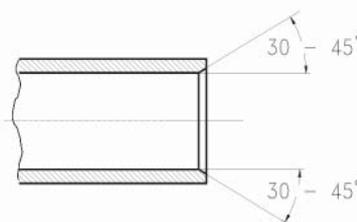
Using a knife or a special tool cut out the inner edge of the pipe to be heated at an angle of 30-45°. This should be done especially with pipes of larger diameters, i.e. from 40 mm diameter and more. This prevents bulging of material when sliding into the fitting.
